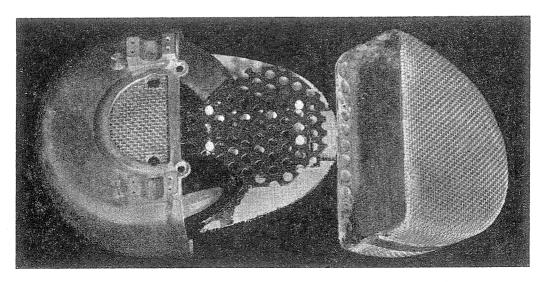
Microphone Type PGS. Assembly with stirrup removed
